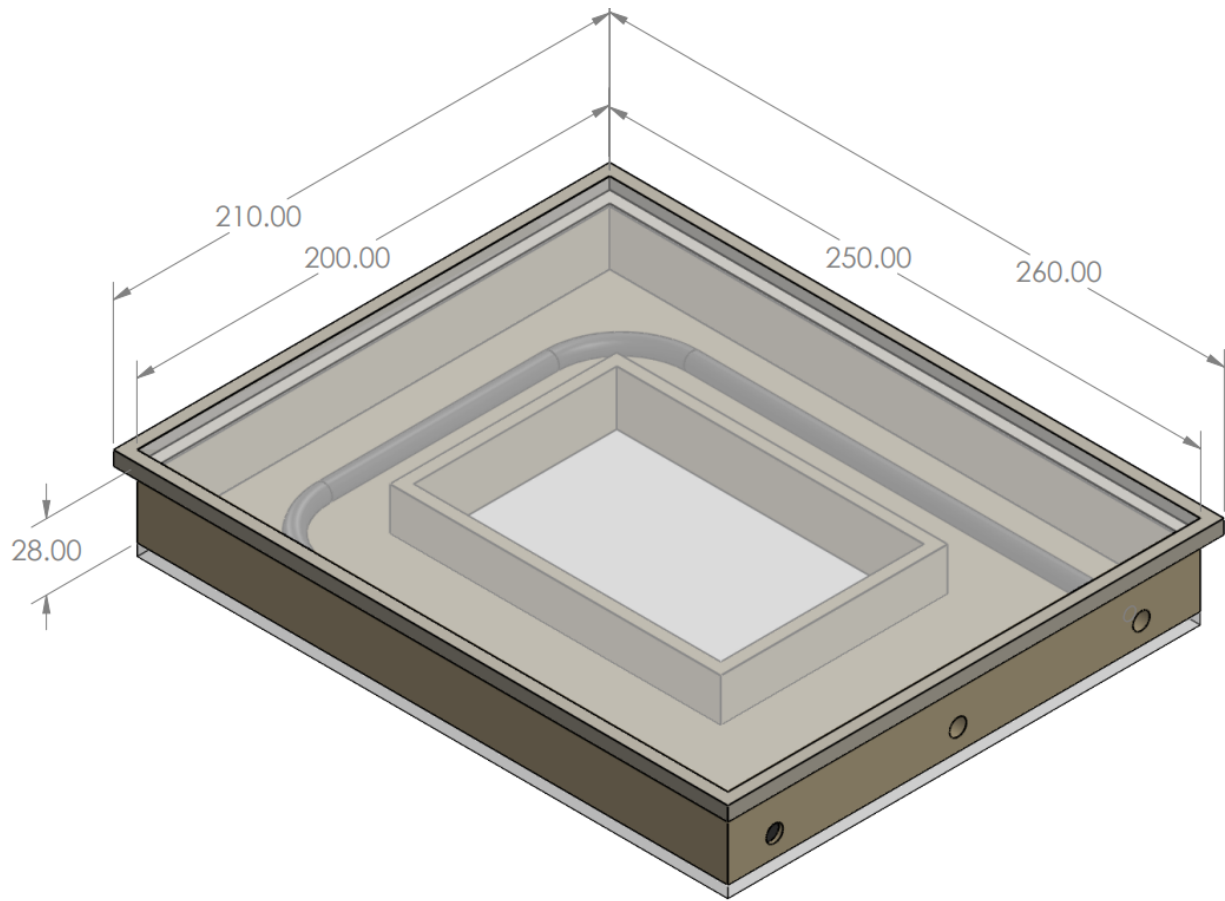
Collapsed view of Heated water pump incubator design with dimensions in mm.
